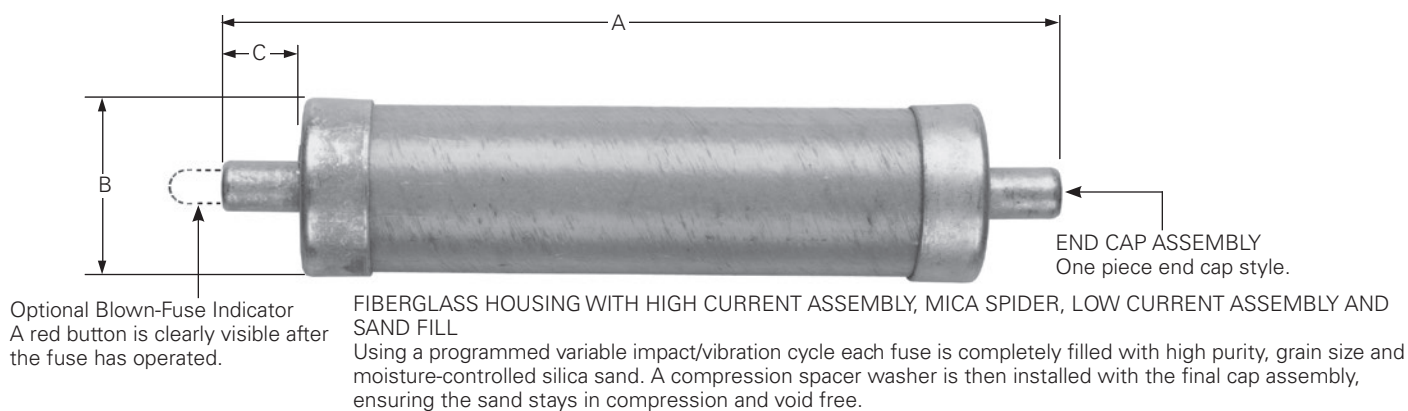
X-Limiter full-range current-limiting clip-style fuse shows details and dimensions. (See Table 4 for dimensions.)
